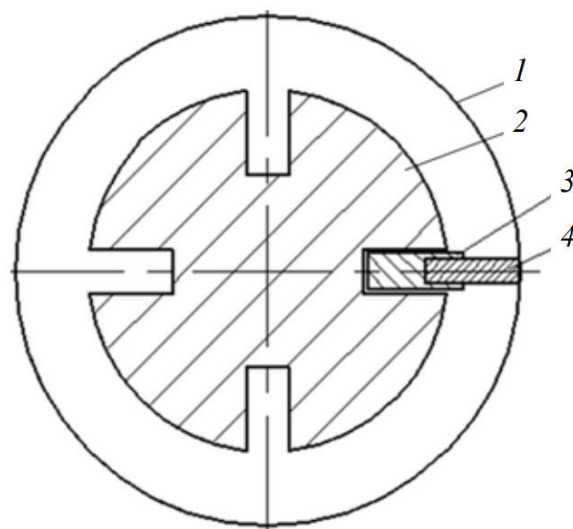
Scheme of a rotary apparatus with movable composite blades: 1 – stator; 2 – rotor; 3 – the base of the movable blade; 4 – the tip of the movable blade [57, © Al-Jarah]
